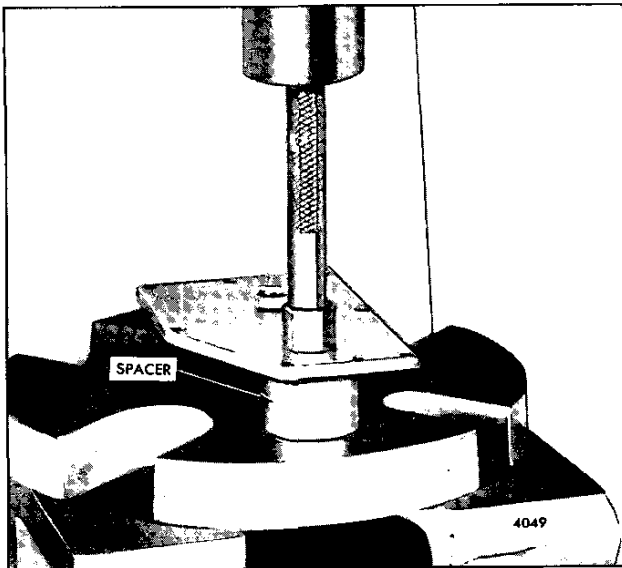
Removing Governor Cover Bearing Using Tool J 21967-01
